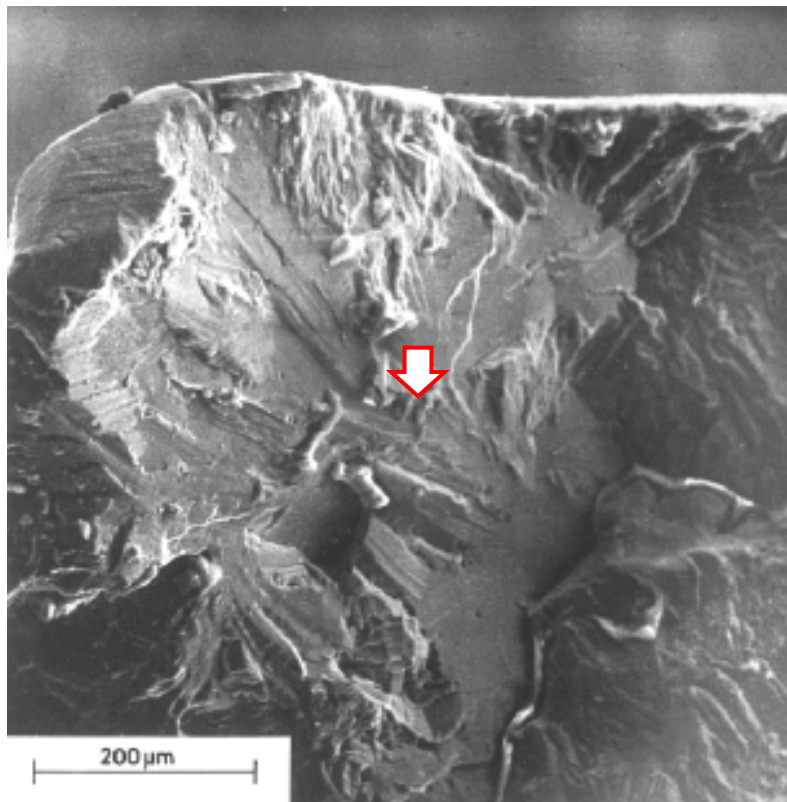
Subsurface high-cycle fatigue crack initiation in a shot-peened unnotched coupon machined from an AA7079-T652 forging [B.16]. The arrow indicates the approximate location of the fatigue origin.
